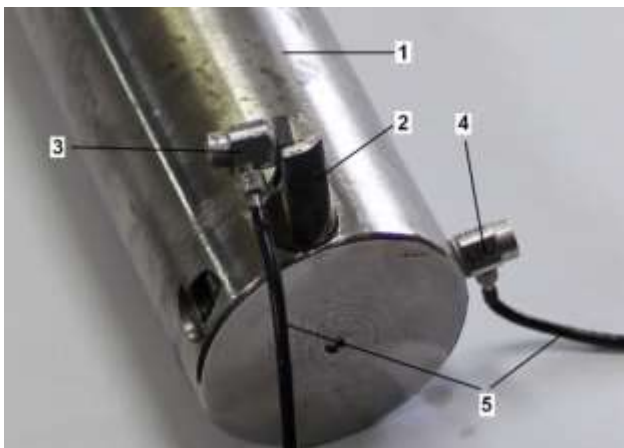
Practical realization of modified tool structure: 1 - boring tool holder, 2 - cutting insert, 3 - sensor for radial and 4 - for tangential vibrations measurements, 5 - cables
